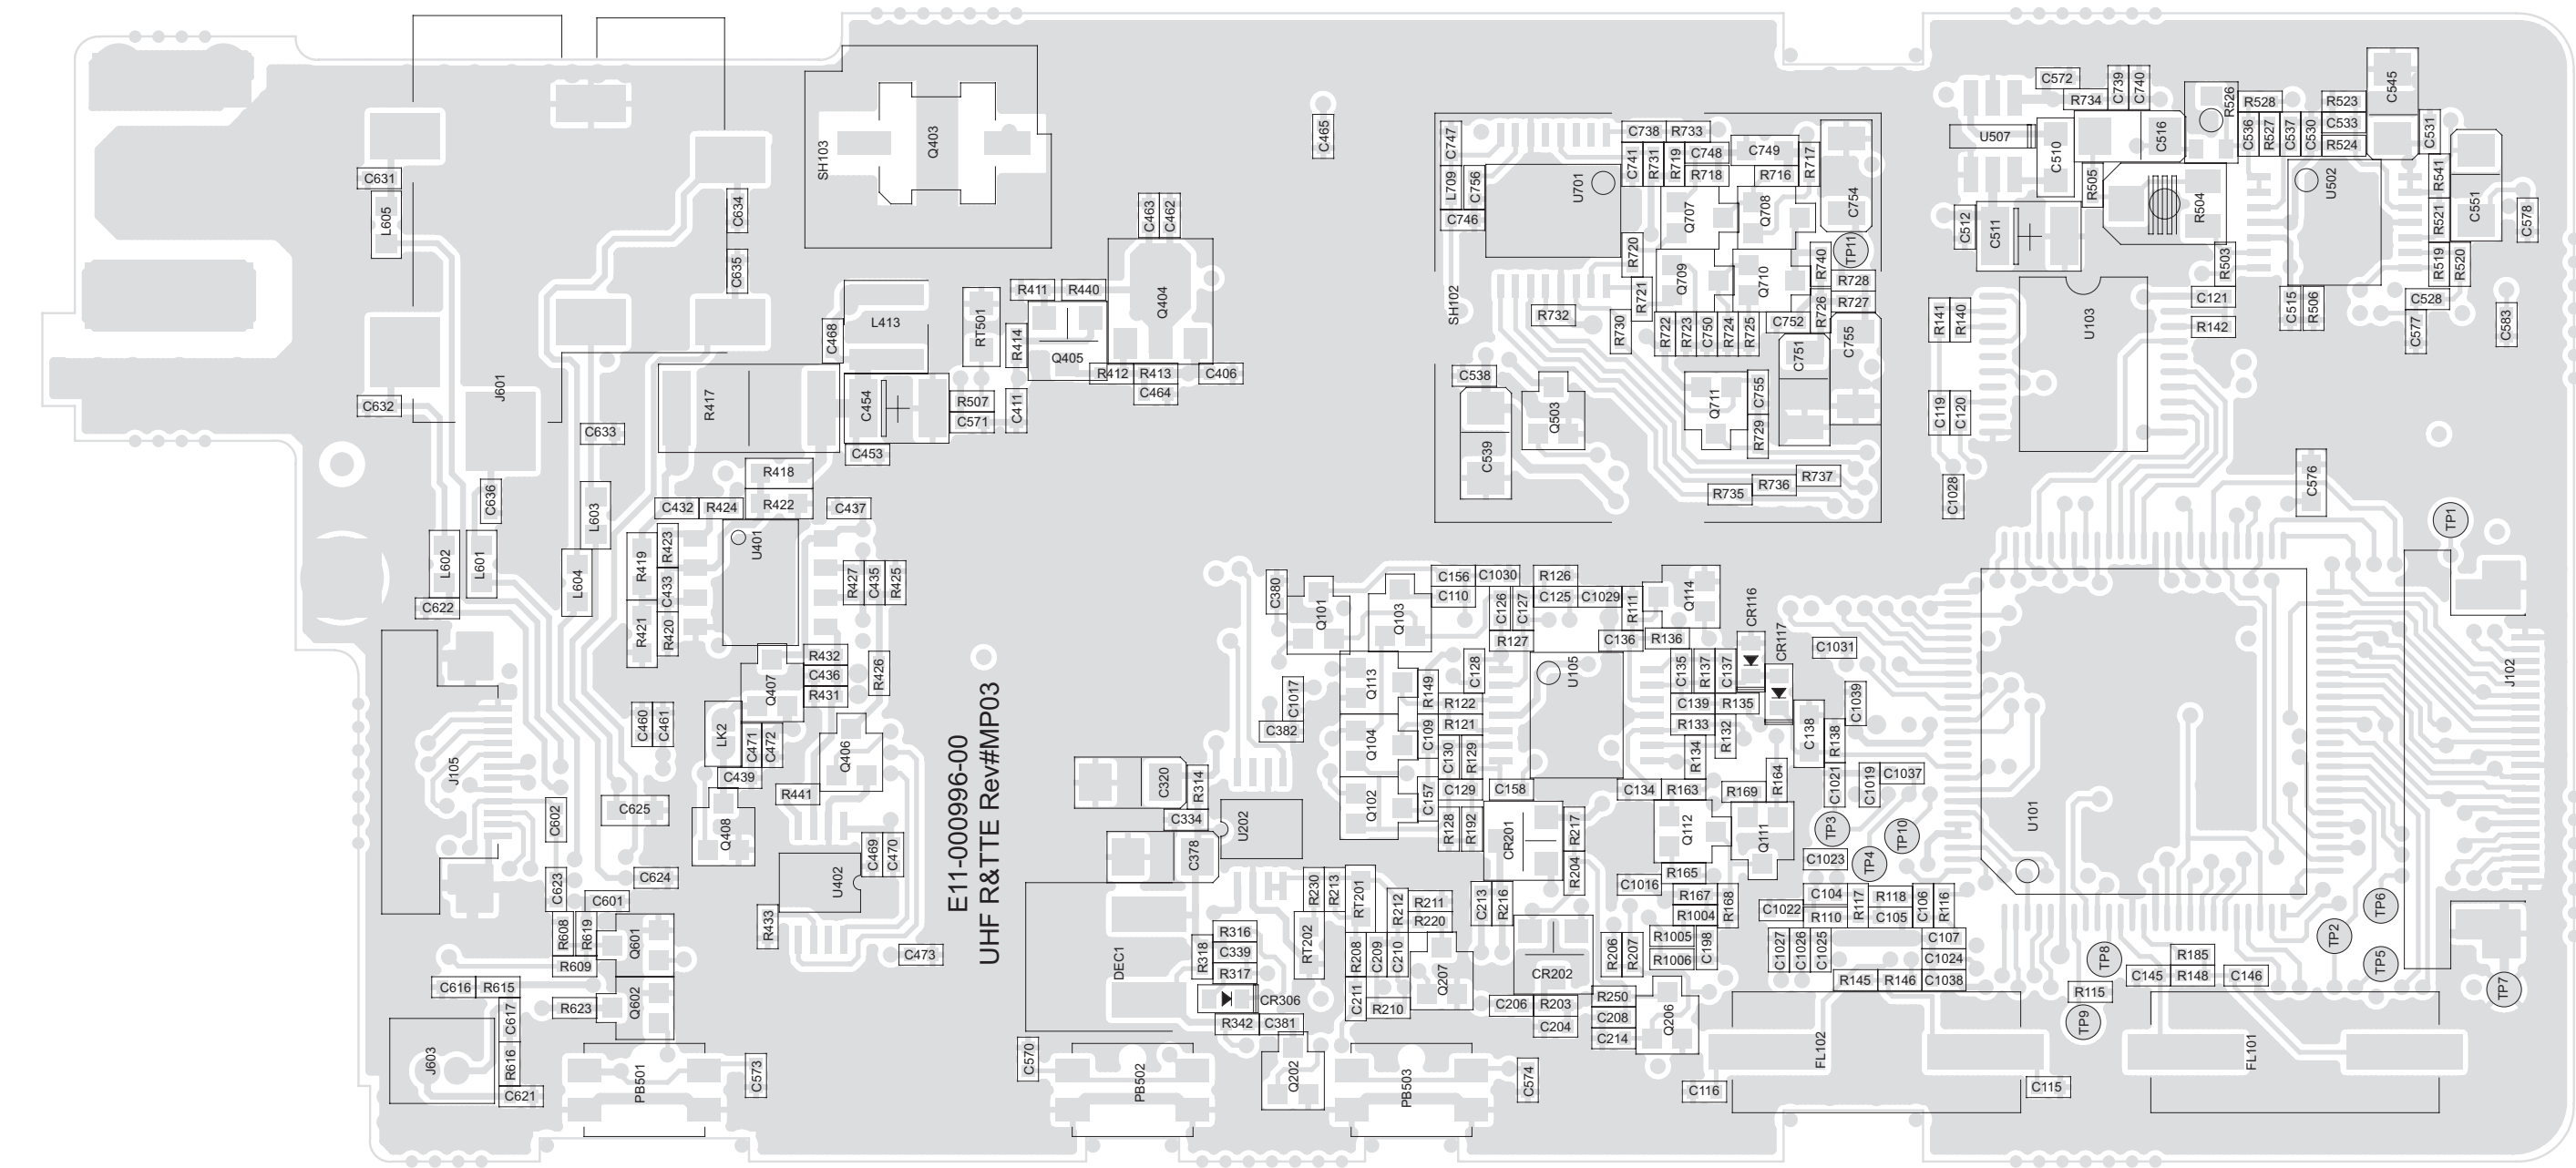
UHF2 R&TTE (435–470 MHz) Mainboard Top Side: PCB No. E11-000996-00
